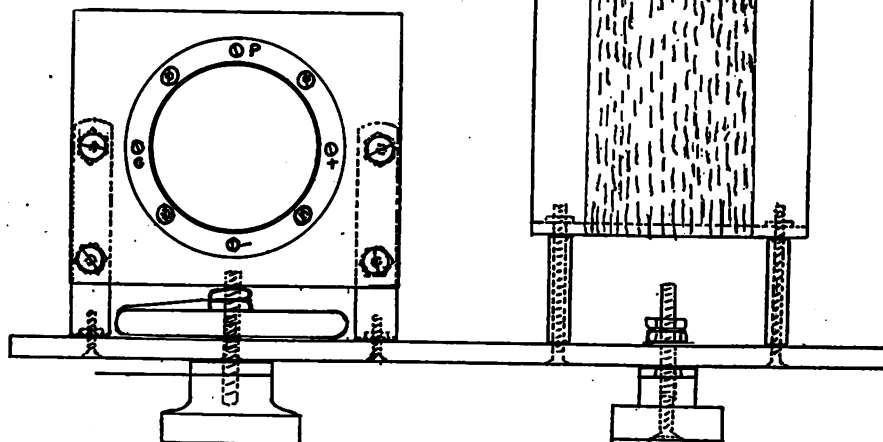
This drawing gives the builder the proper idea of mounting. It shows the top view. Drawn by Harold S. Potter.
